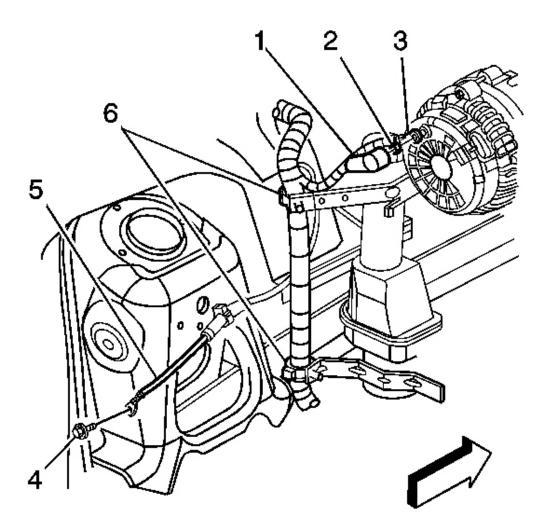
View Of Generator Cable Boot, Head, Nut & Bolt Courtesy of GENERAL MOTORS CORP.
